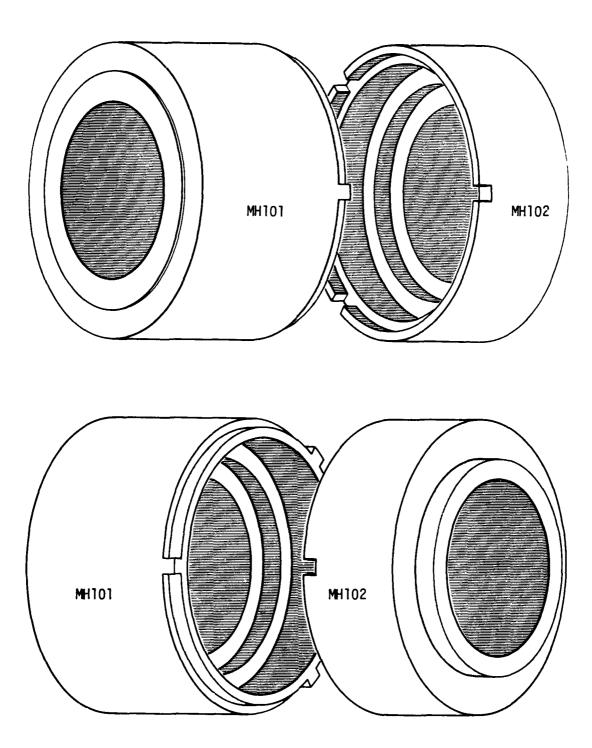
Radial and circumferential interlock design of outer ring assembly.
